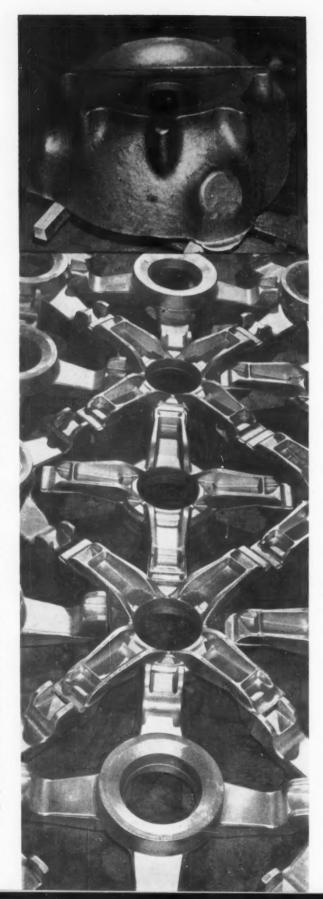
(Below) Magnesium forgings for helicopters weighing 81 pounds and measuring 35 inches across the maximum dimension. They were made by closed dies in an 18,000-ton press.
